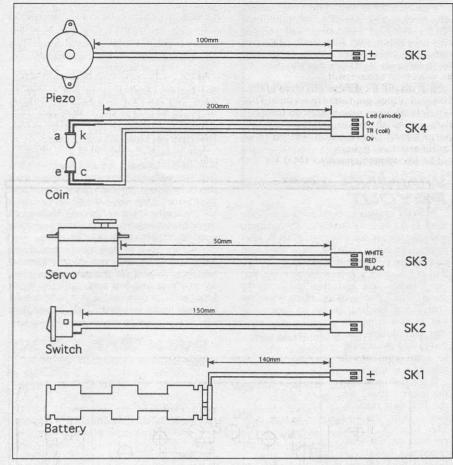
Interwiring ribbon cable runs from the piezo sounder (top), coin detector, coin payout servo mechanism, on/off switch and battery holder (bottom) to the printed circuit board connector plugs.
